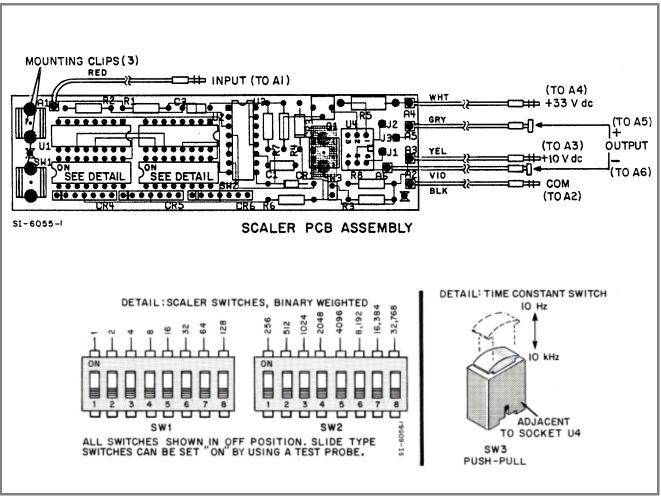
LAYOUT, SCALER ASSEMBLY (OPTION)
